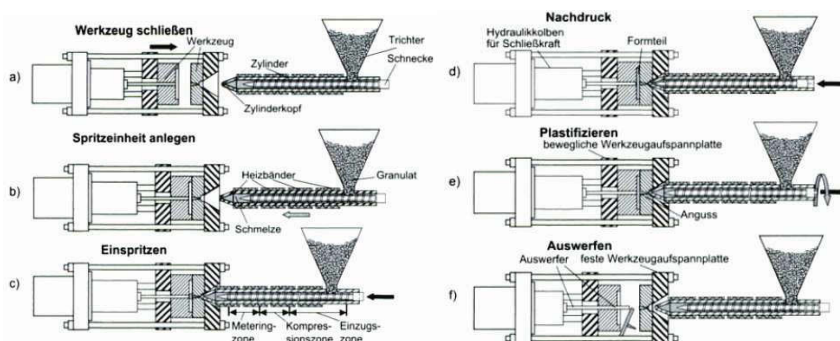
Injection moulding process; a) mould closing; b) moving of injection unit; c) injection phase; d) holding pressure phase; e) plastification phase; f) mould open and ejection; based on /6/
